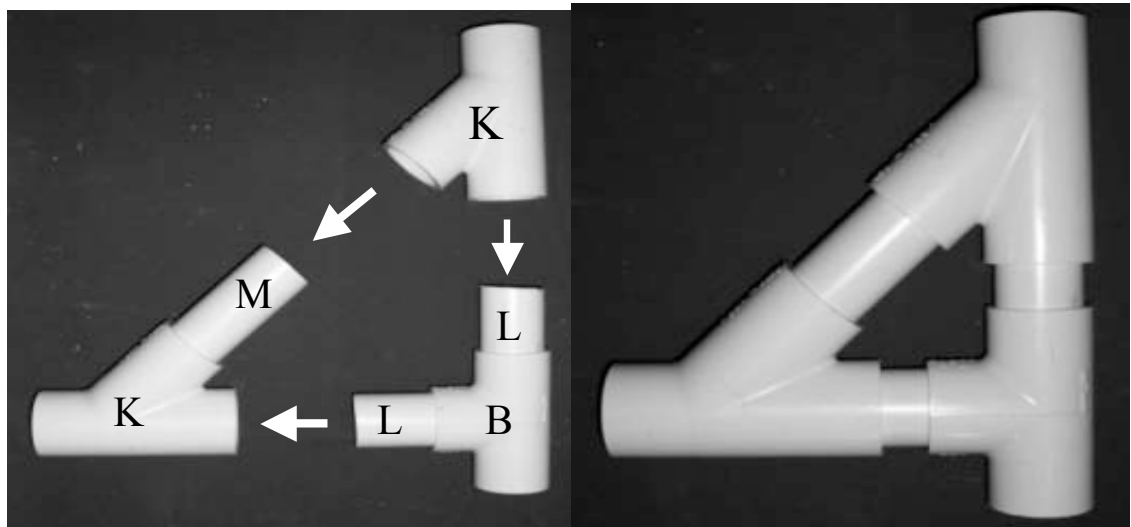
Step 5 (Left) and Finished Section (Right) – Wheelchair Side Frame.
